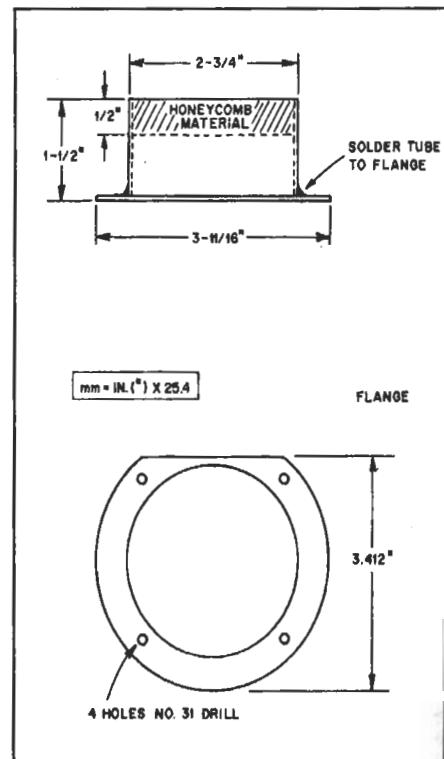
Mechanical details of the exhaust air RFI filter. The honeycomb material is soldered inside a 2 $\frac{3}{4}$ -in OD, 0.065-in wall brass tube. The flange, which bolts to the chassis, is made from 0.125-in-thick brass sheet.
